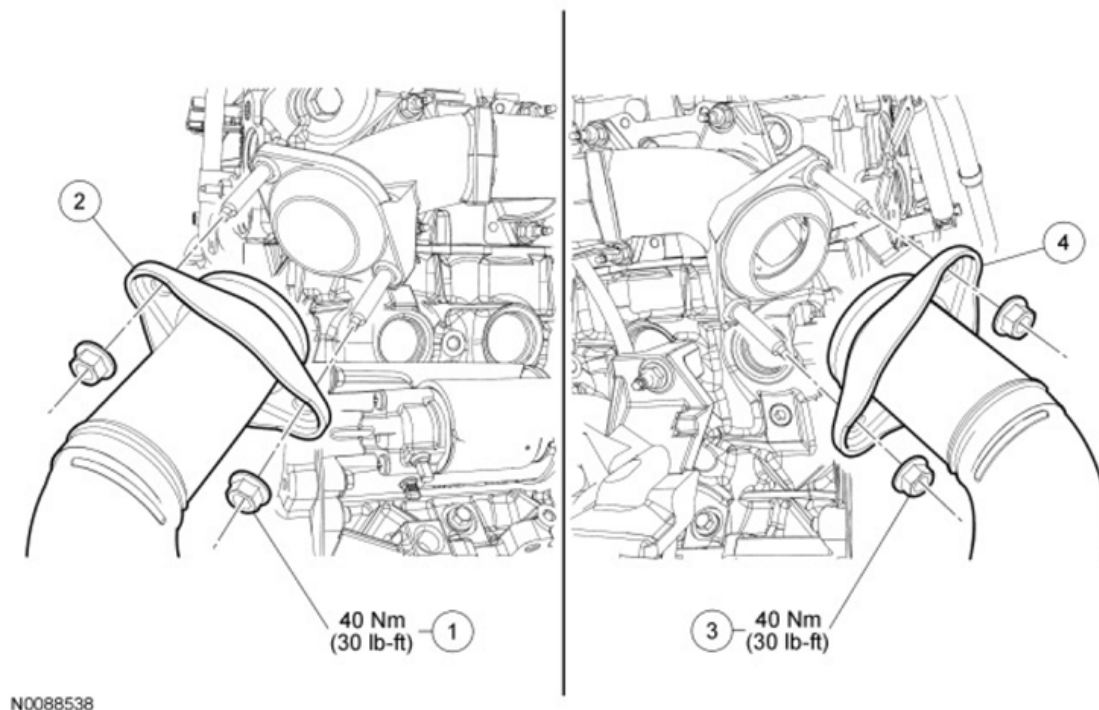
Identifying Exhaust Y-Pipe Flange Nuts With Torque Specifications (RH And LH)
